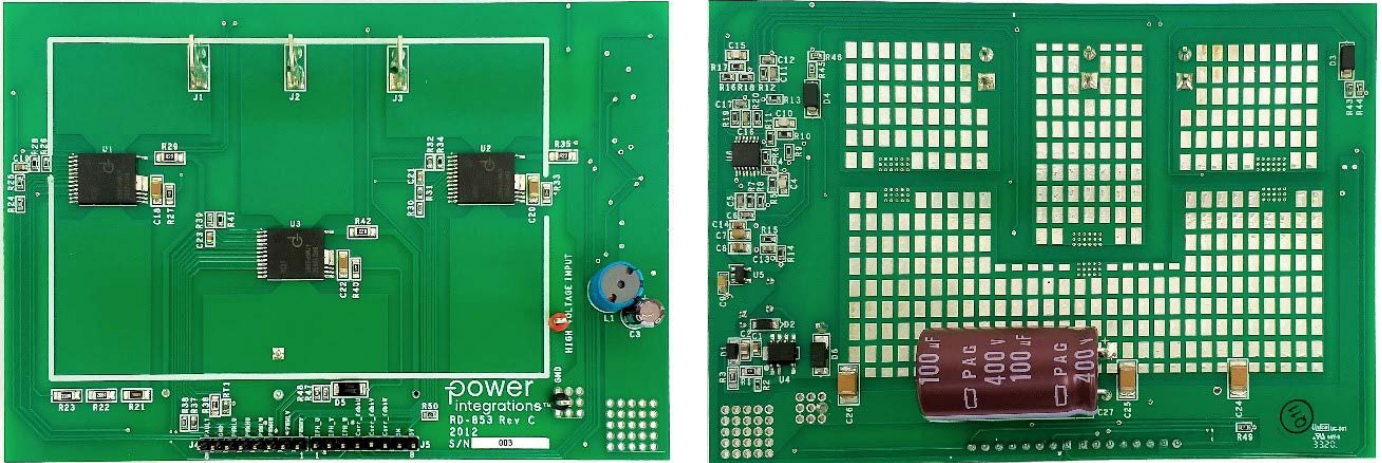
Triangular PCB Configuration Board (125 mm x 85 mm).
